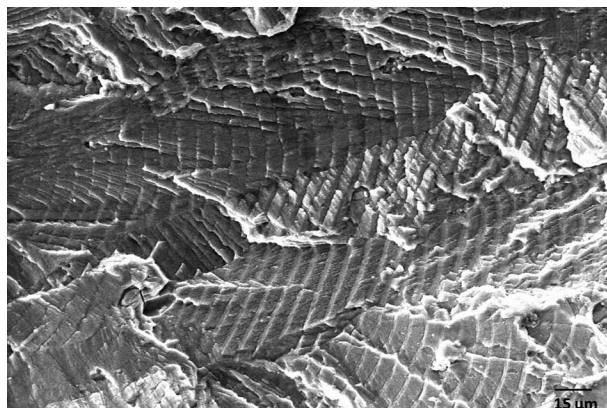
Fractograph of the room temperature fatigue-tested specimen of AA2219-T87 indicating striation markings
